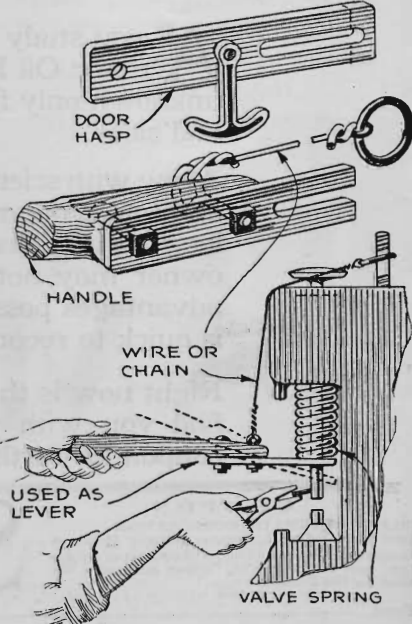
Easy to make a valve lifter at home with hammer handle, bolts, ring, and bit of wire.
